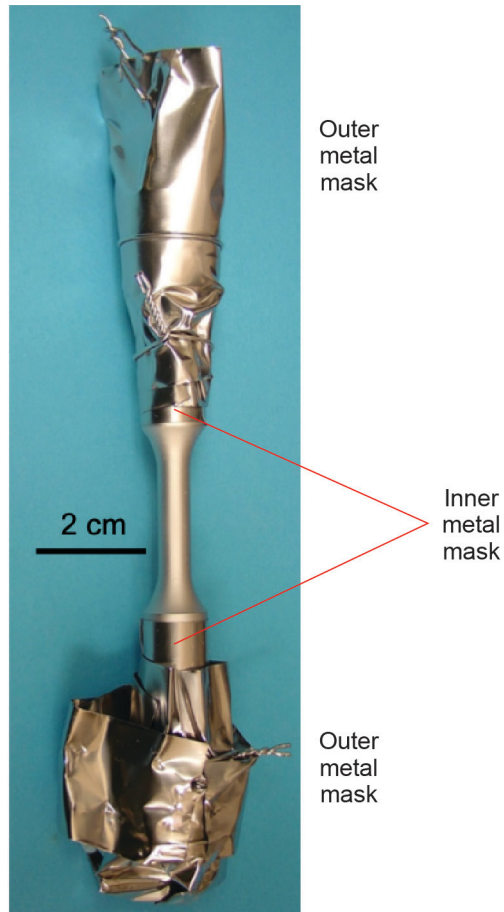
Large fatigue specimen showing the inner and outer metal masks with exposed test section to be coated.
